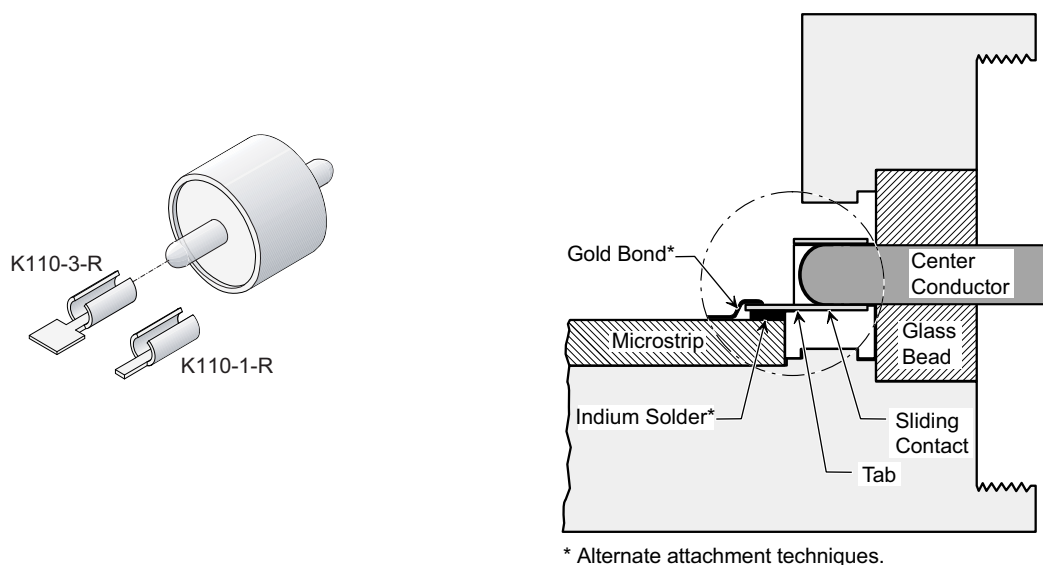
K110-1-R or K110-3-R Sliding Contact Assembly
